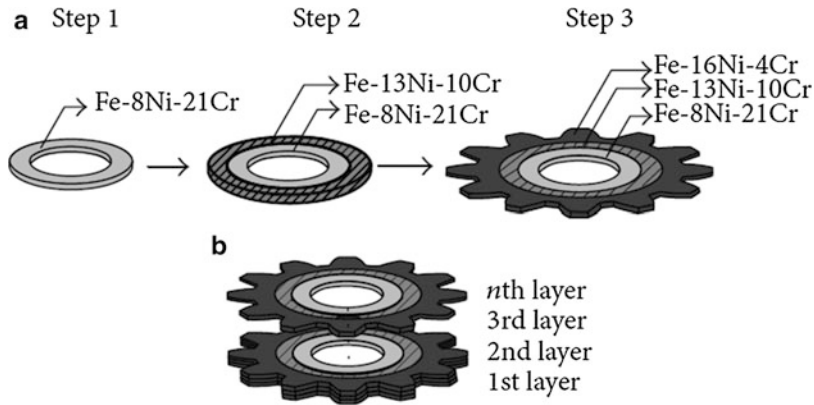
Schematic of gear fabrication technique. (a) Layer fabrication, (b) layer-by-layer fabrication [51]
